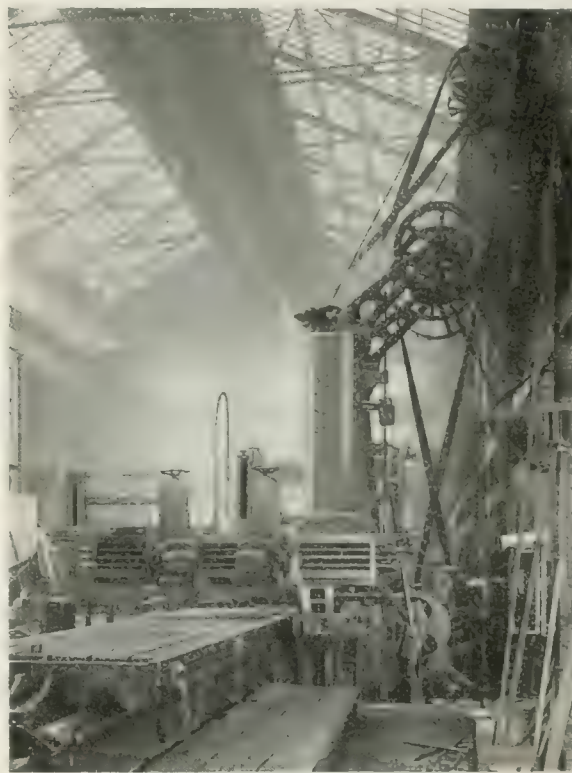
OPEN SIDE PLANER, BELT DRIVEN BY A NON-REVERSING MOTOR
